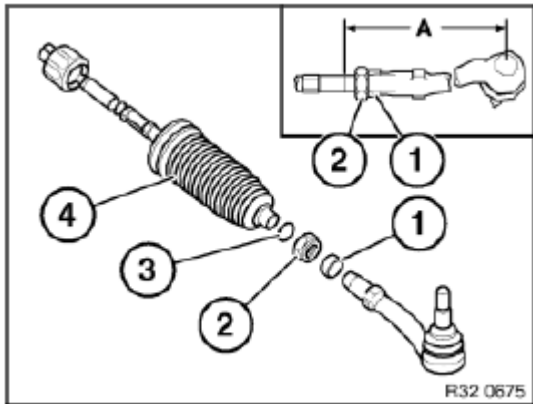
Identifying Clamping Ring, Clamping Nut, Gaiter And Band Clamp
